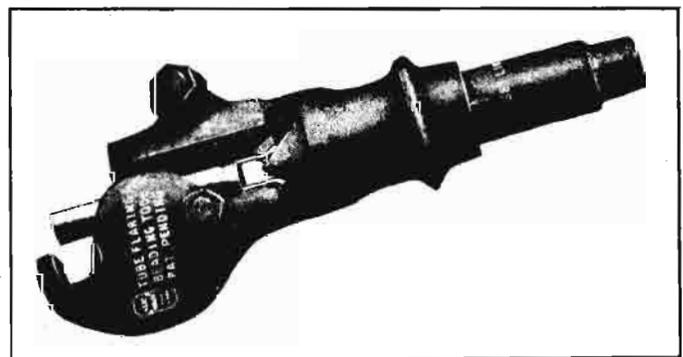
Hydraulic Brake Tube Double Flaring Tool
